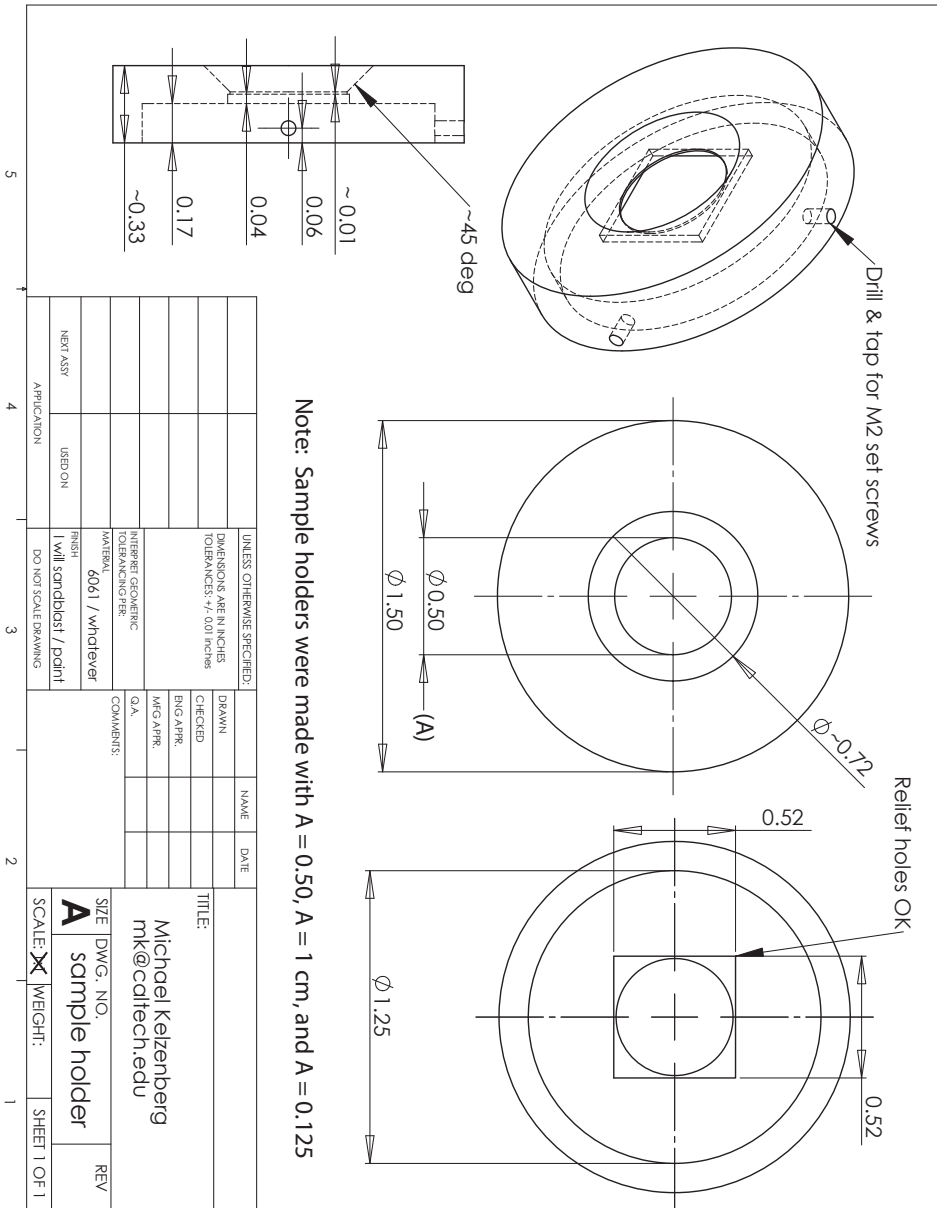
Mechanical drawing: Transmission-mode specimen holder.
